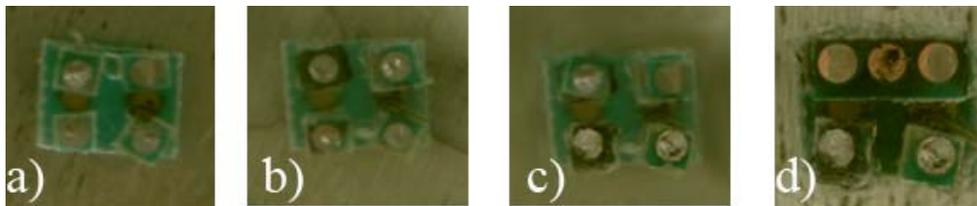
a) First layer, b) Second layer, c) Third layer, d) Final assembly with electrode across two of the parts.
